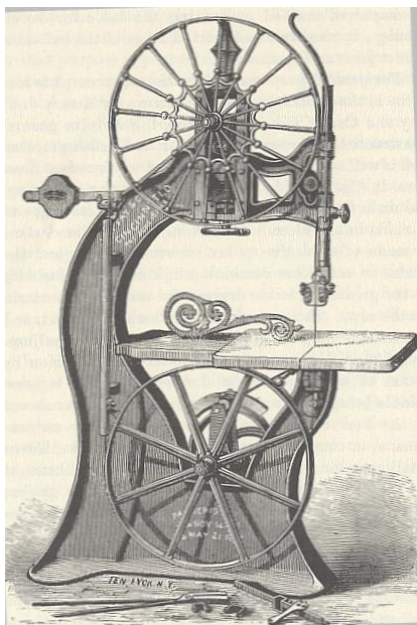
NEWBERRY'S BAND SAWING MACHINE, PATENTED 1808.
